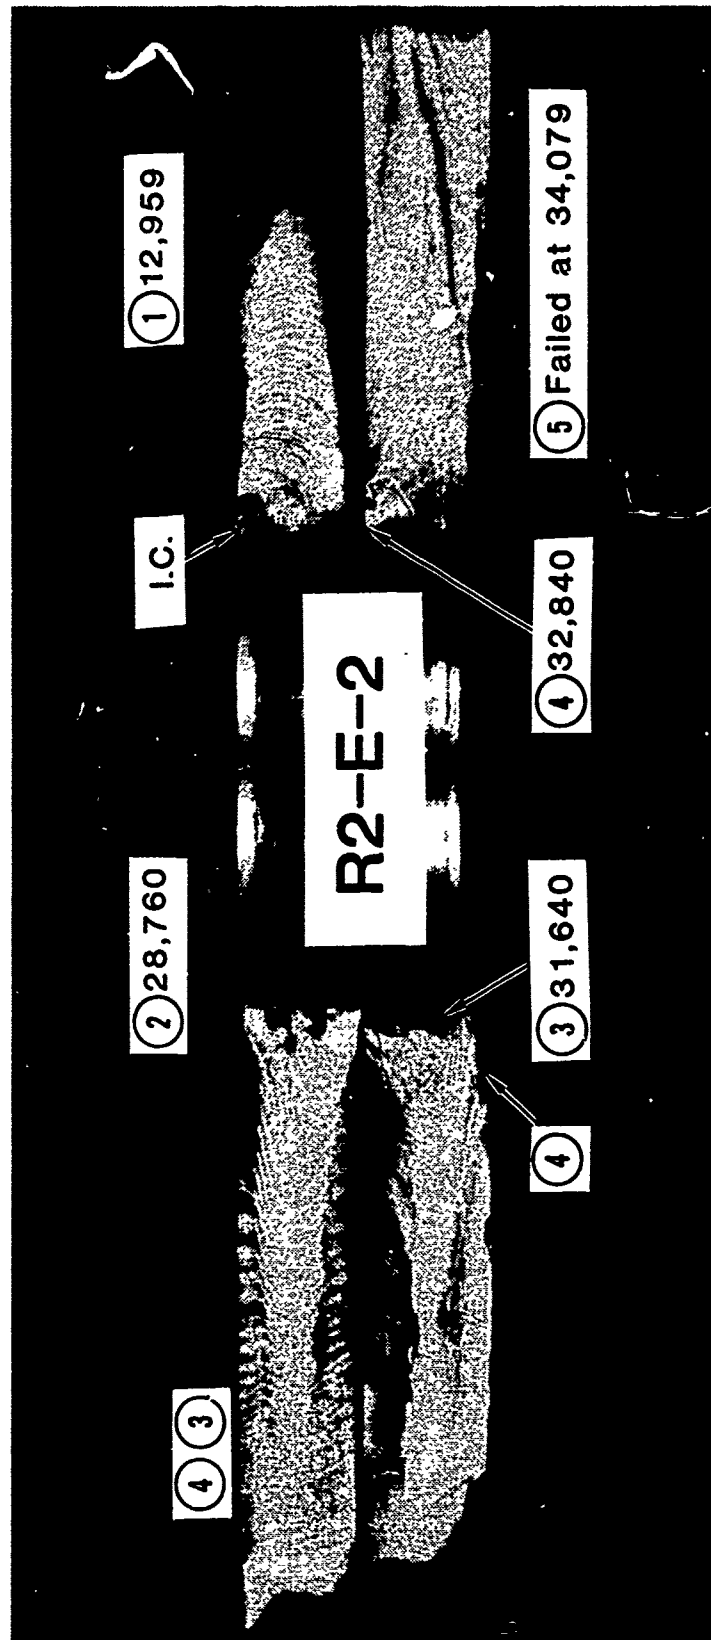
Fracture Surface of Simulated Wing-Pylon Lug Specimen R2-E-2
